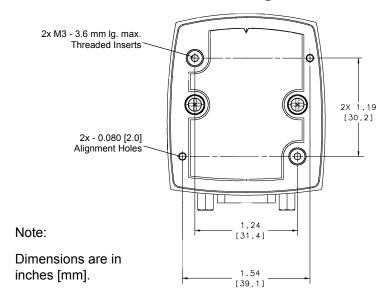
MS 804FZY/MS 904HS Mounting Dimensions
